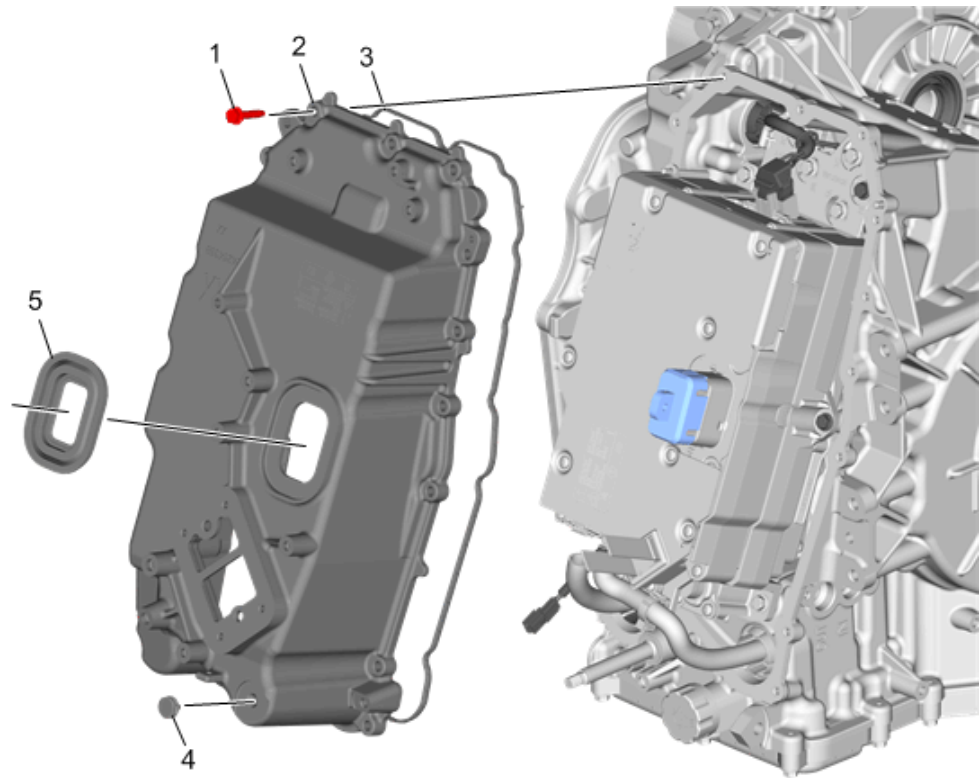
Drive Motor Power Inverter Module Cover And Components
